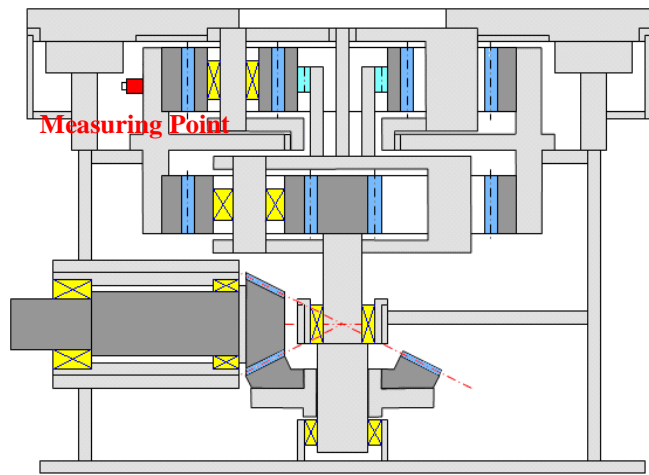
Vertical Roller Mill Gearbox Schematic Diagram
